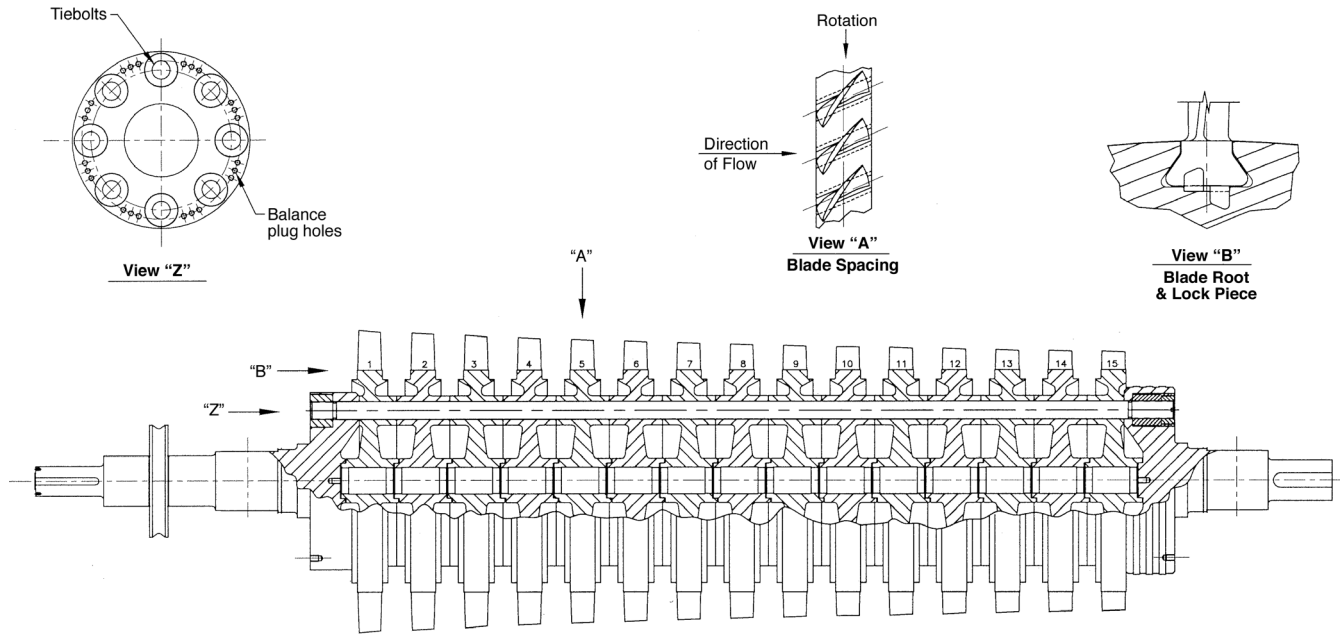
Axial Compressor Rotor Construction: Stacked Disks with Tie Bolts
